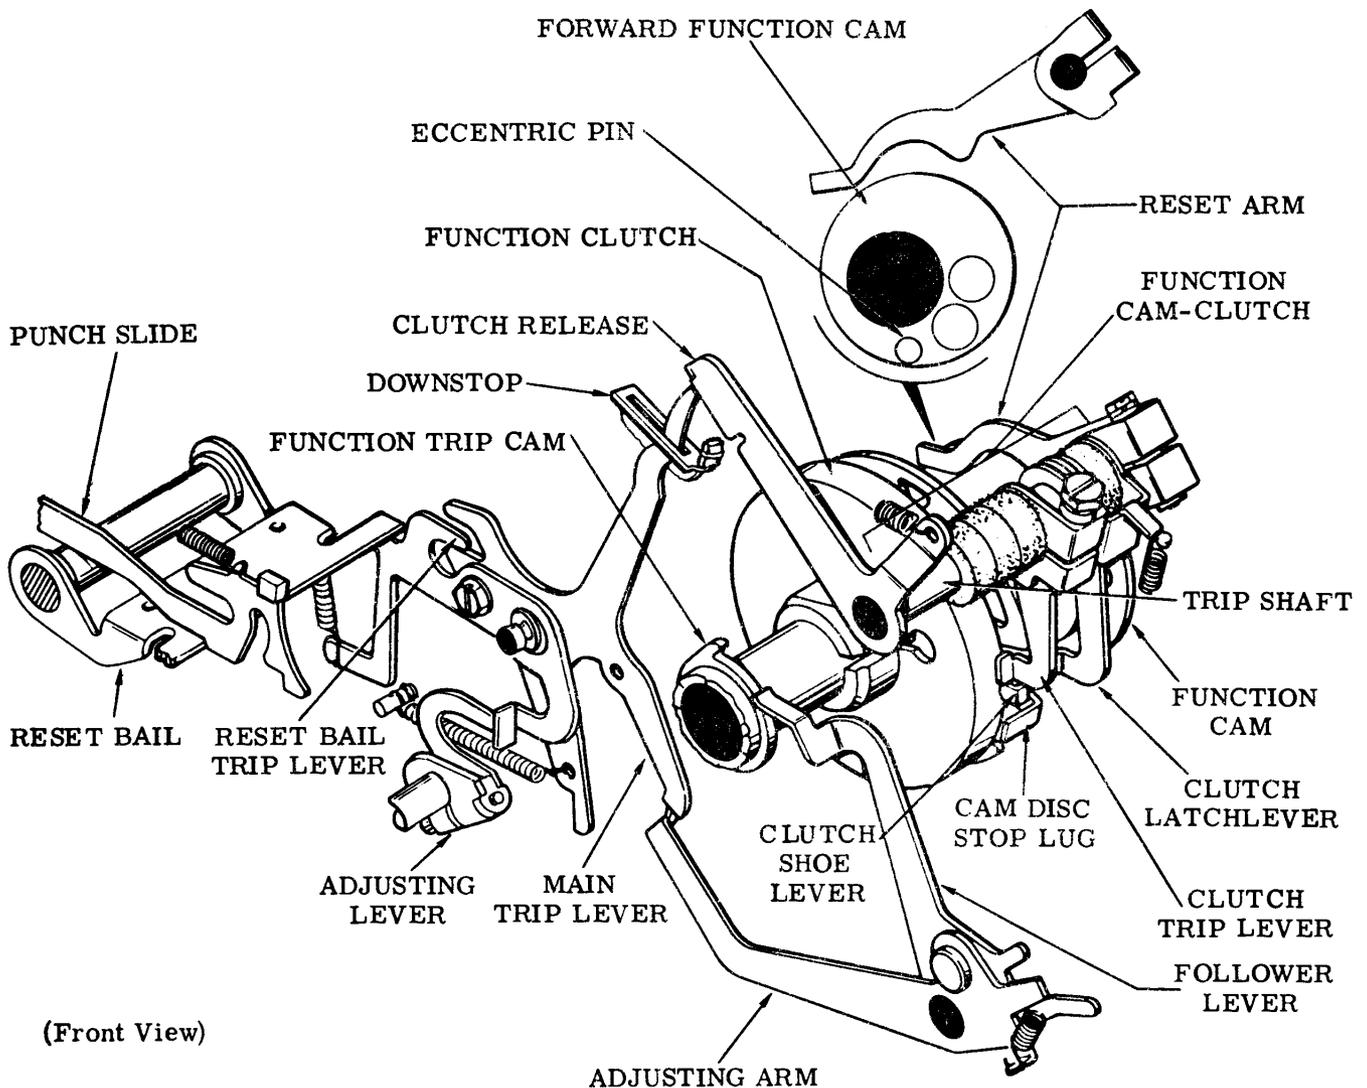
Function Cam-Clutch and Clutch Trip Assembly
